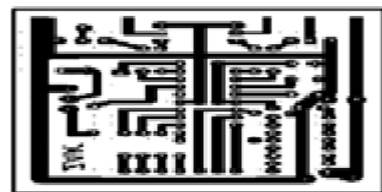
PROTECTION SYSTEM BOARD LAY OUT
